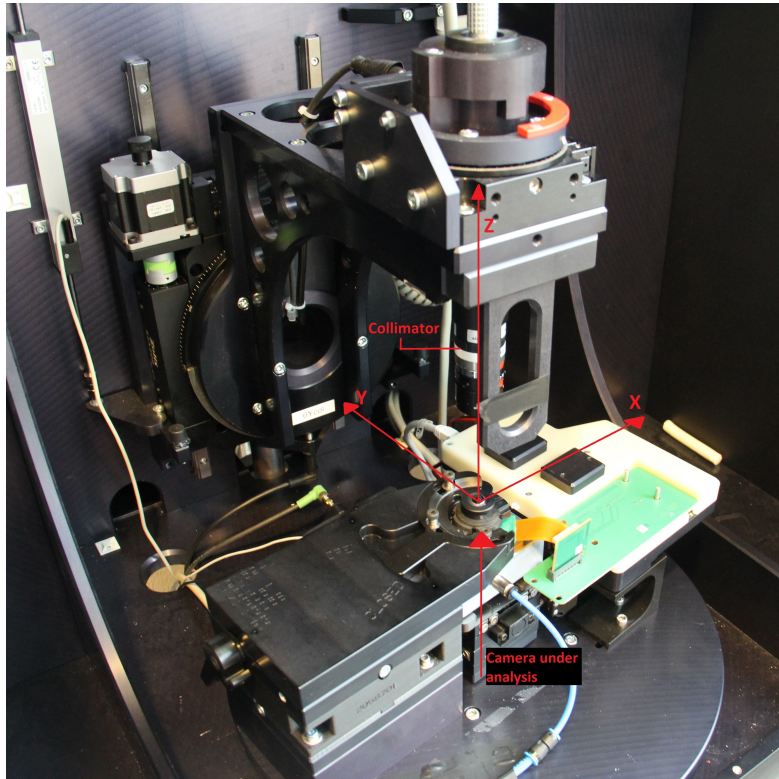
Interior of the Modus machine, showing the collimator, an installed camera and the definition of the machines coordinate system
